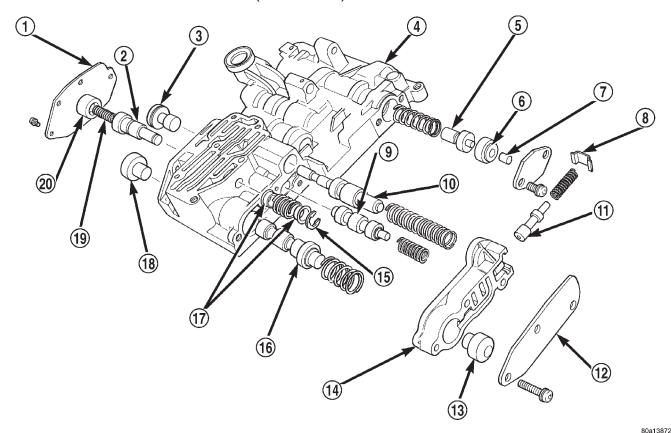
Control Valves, Shift Valves, And Governor Plugs
